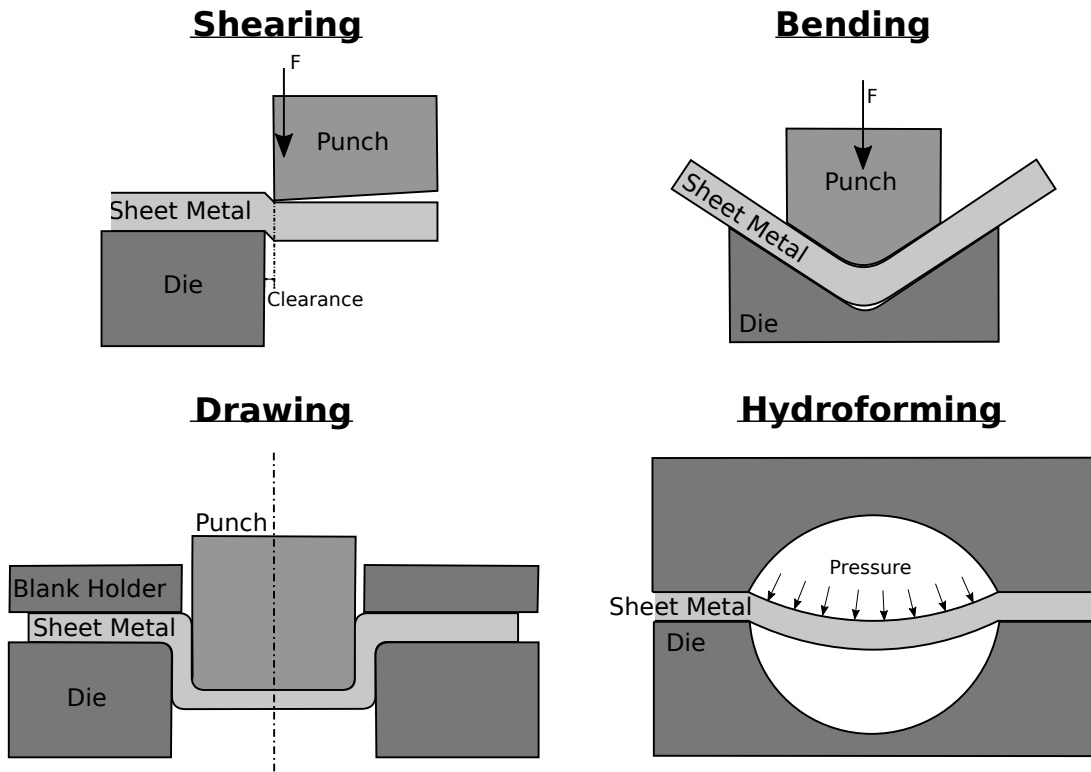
A graphical representation of four general sheet metal forming processes: Shearing, Bending, Drawing and Hydroforming.
